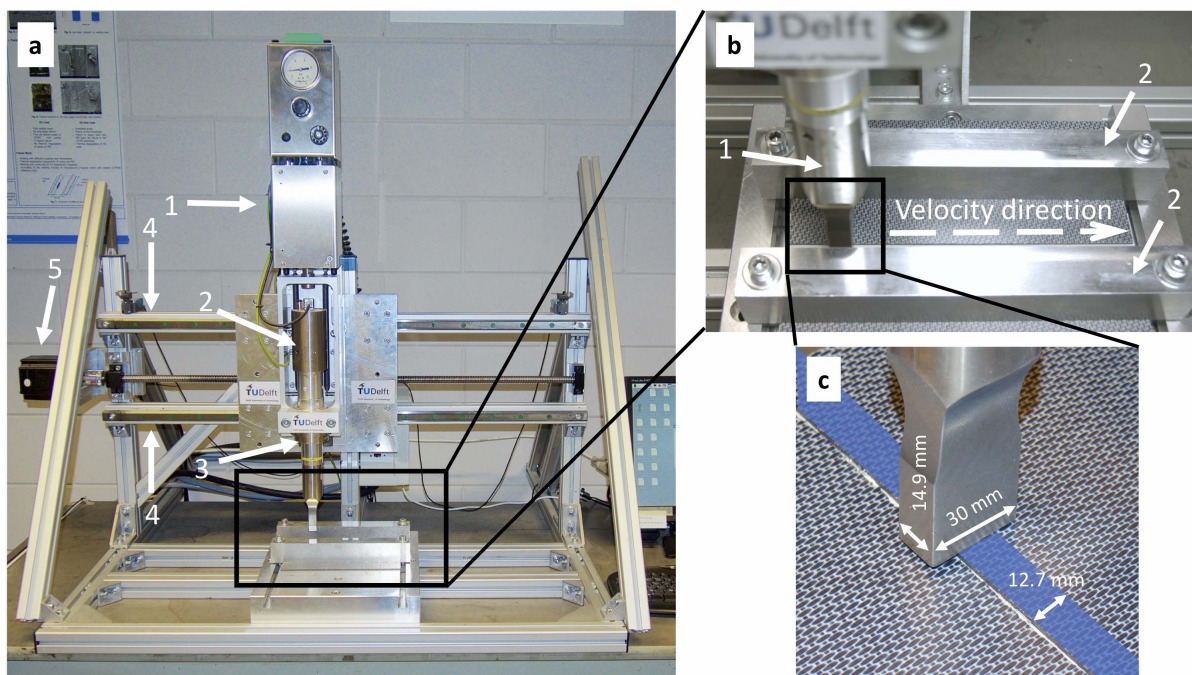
(a) Overview of setup used for continuous ultrasonic welding (1. pneumatic press, 2. converter, 3. booster, 4. rails for moving the stack, and 6. stepper motor). (b) 1. Sonotrode with indicated welding direction, and 2. bar clamps. (c) Close-up of weld line (blue area) and sonotrode with indicated dimensions.
